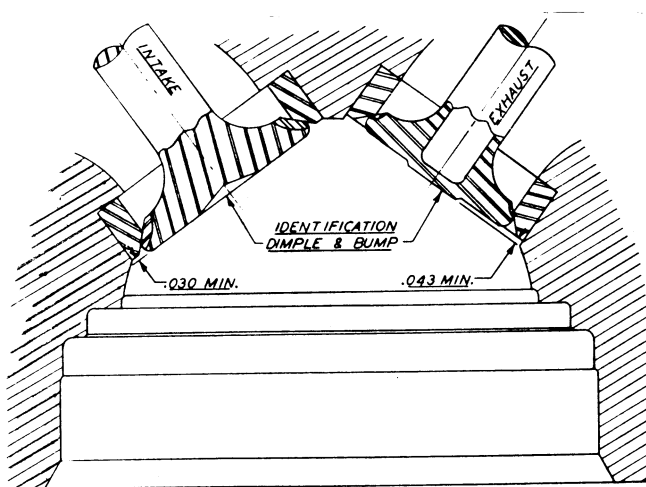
PROPER VALVE SEATING WITH REFACED VALVES AND REGROUND SEATS
